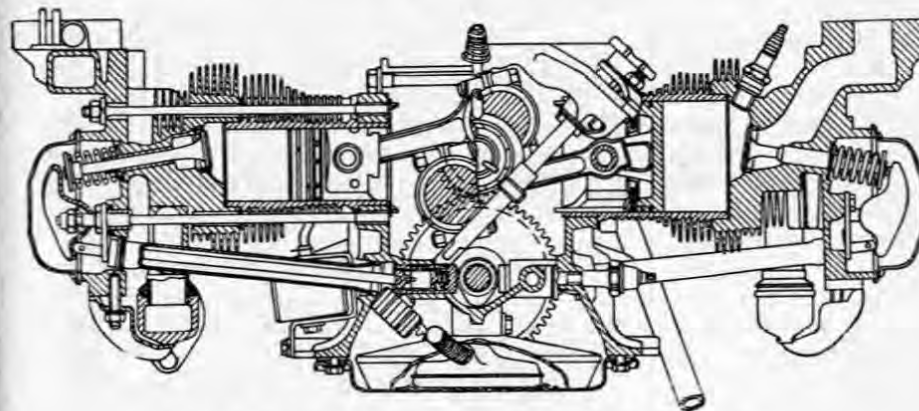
Transverse section of the Chevrolet Corvair engine.
